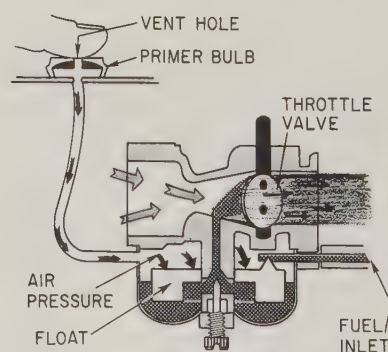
Bulb-type primer. When the primer bulb is pressed down, it pushes air into the carburetor float bowl, causing the float bowl to discharge fuel into the airstream through the carburetor.
